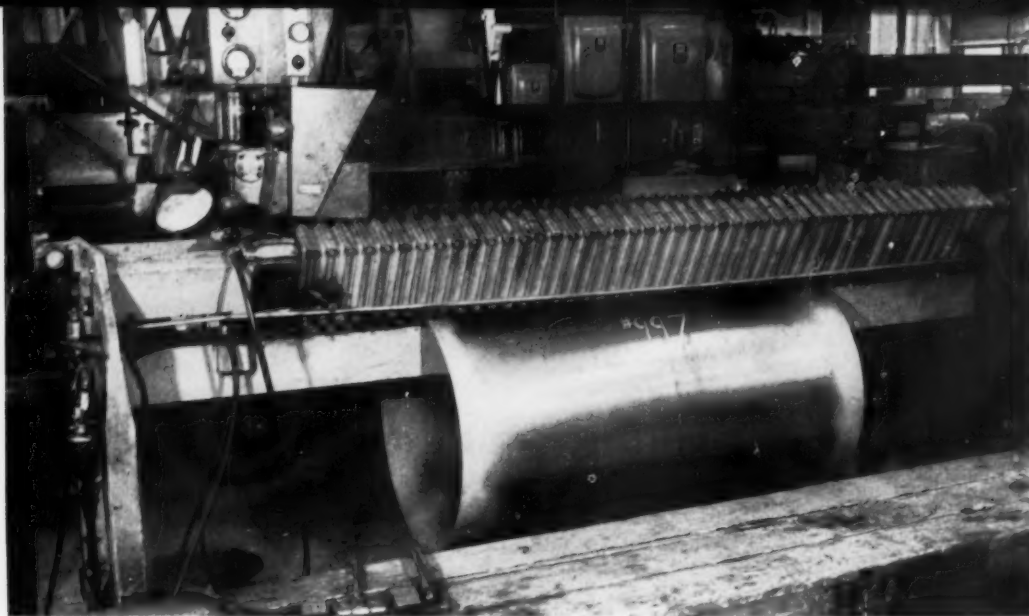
After Rolling Alloy Steel Sheet to Give the Proper Diameter Tube, the Piece Is Placed in This Special Fixture for Welding by the Submerged Arc Process
